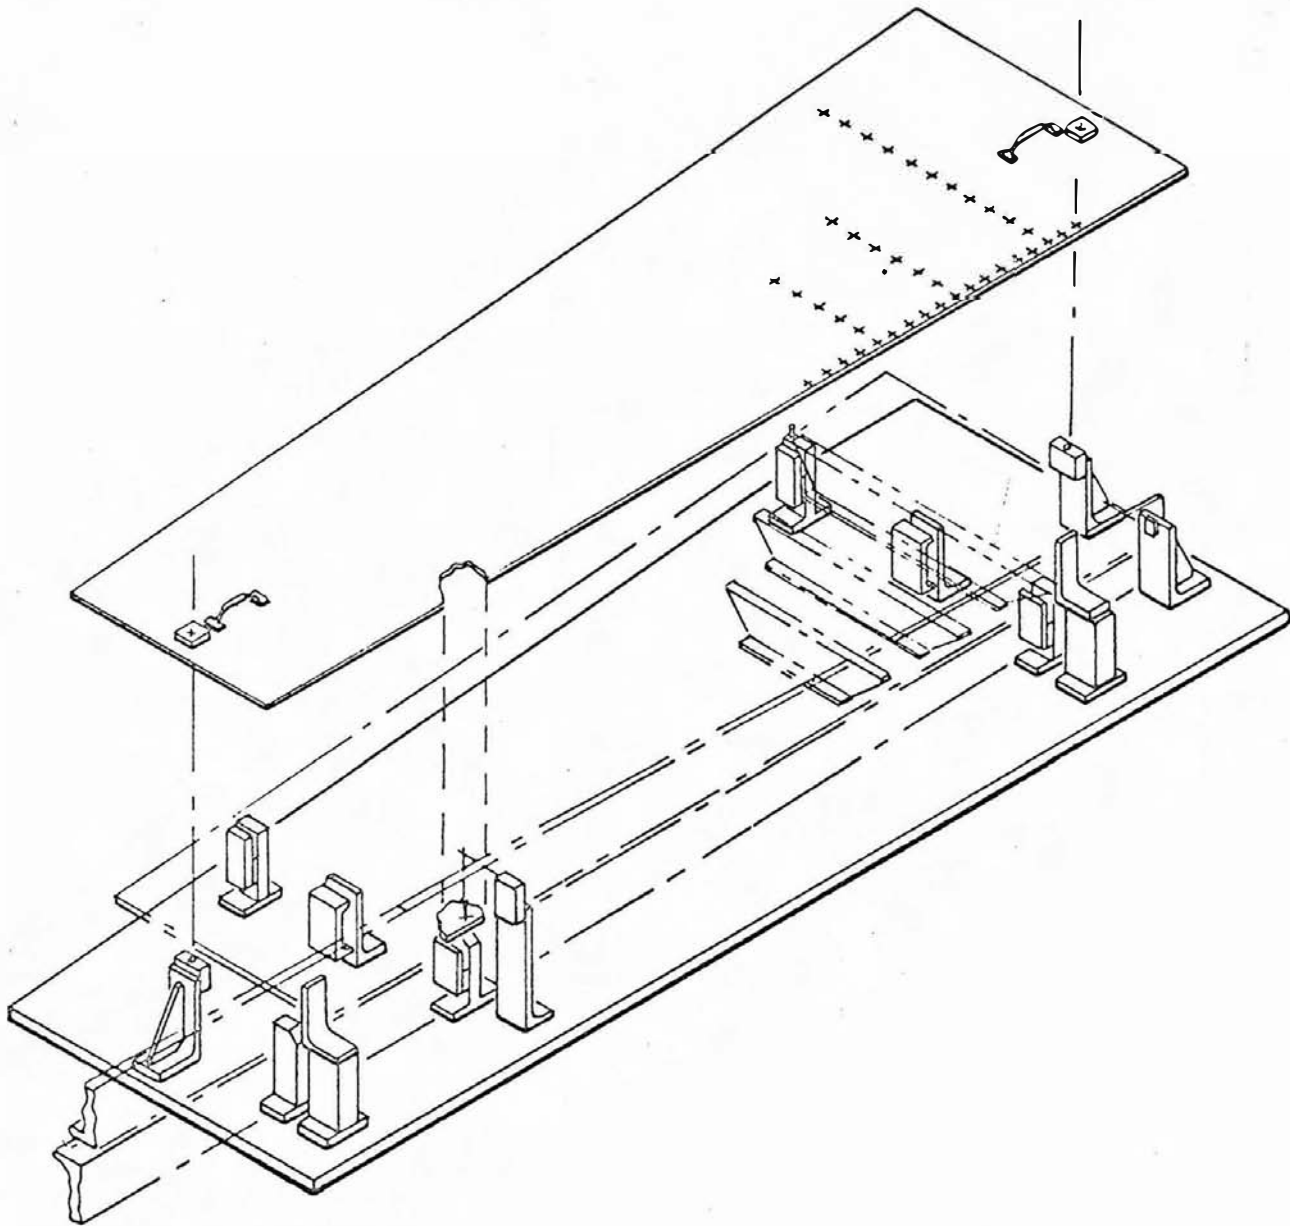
Auxiliary Shear Web Assemblies Assembly Fixture
